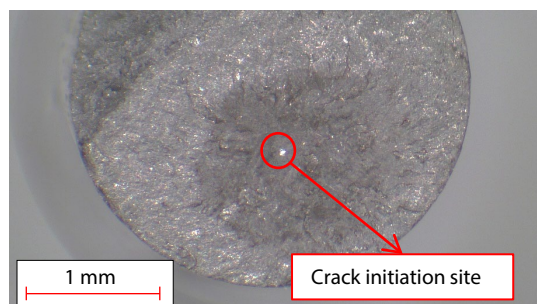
Picture of the fracture surface (Specimen 2)
